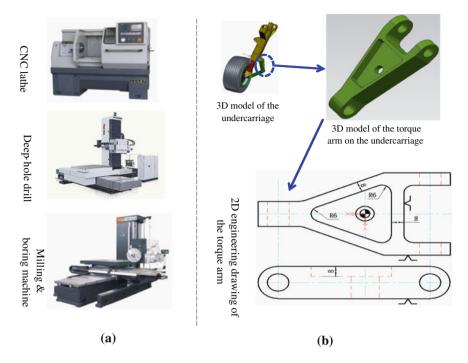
The scenario of the use case. a Three machining devices. b A chosen outsourced part machining task
